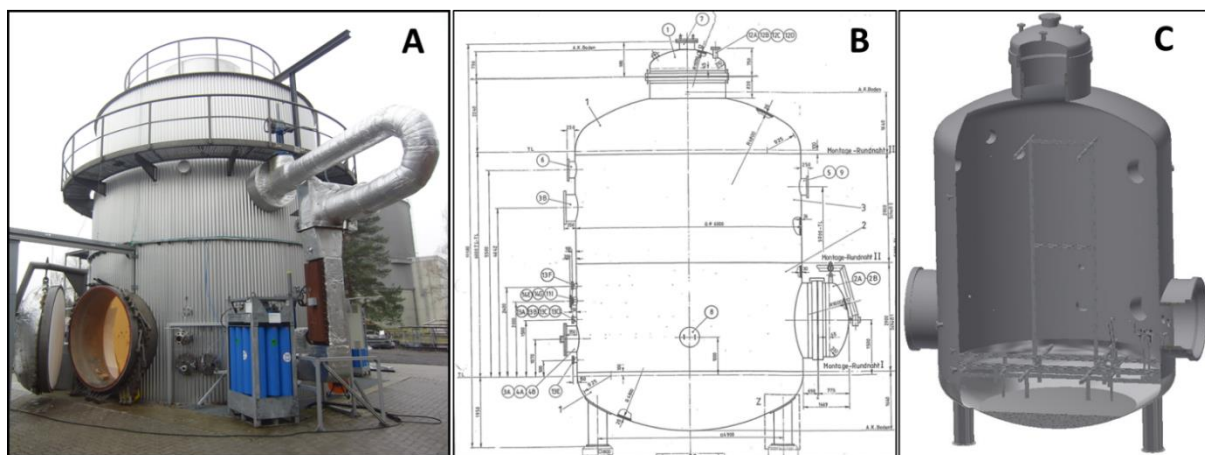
A) Safety vessel V220 (A2) of HYKA, B) Technical drawing, C) Example CAD-drawing.
